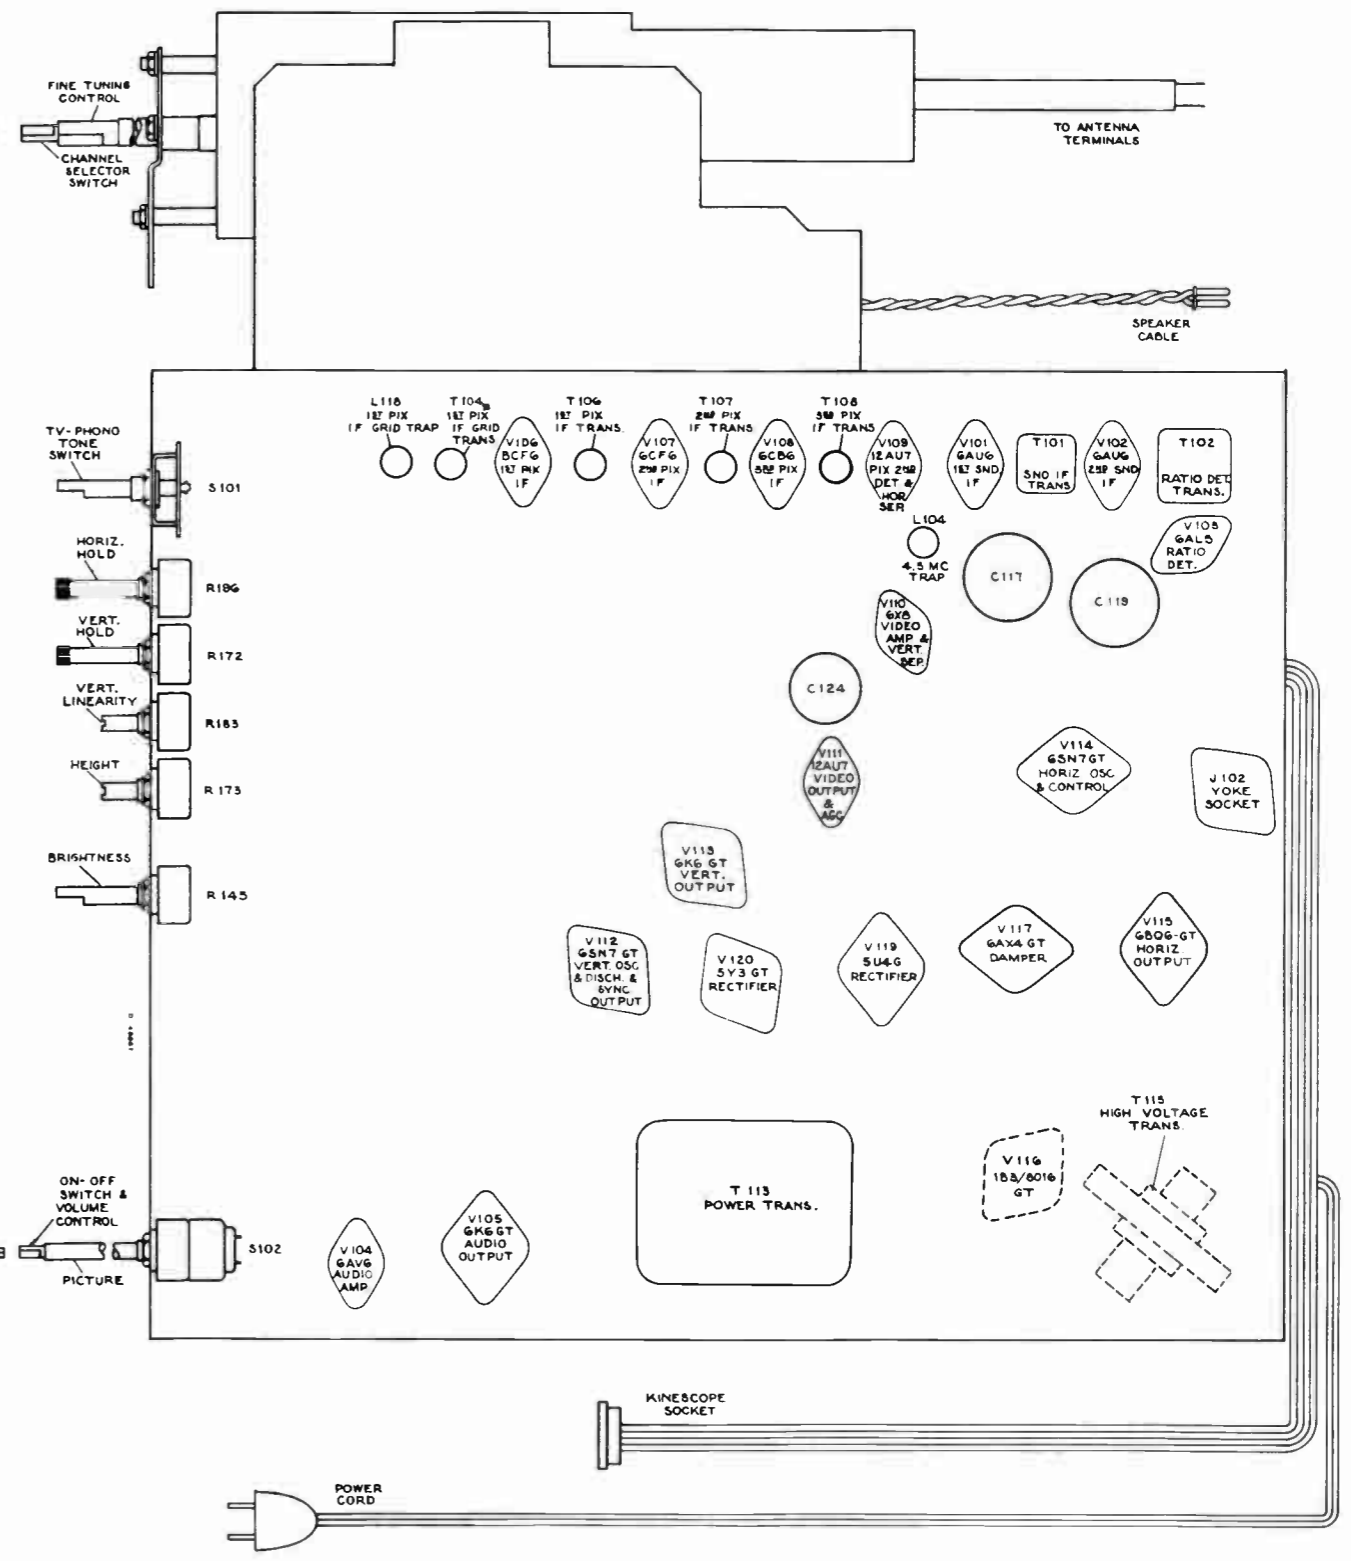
Television Chassis Bottom View (shown with KRK29 Tuner)
